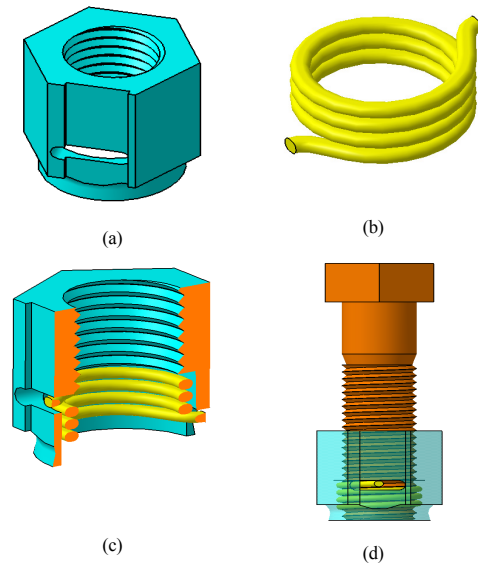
Parts and assembly used in this paper, where the coil spring structure is proposed for preventing loosening (a) nut (b) coil spring (proposed) (c) nut & coil spring (d) assembly composed of three parts
